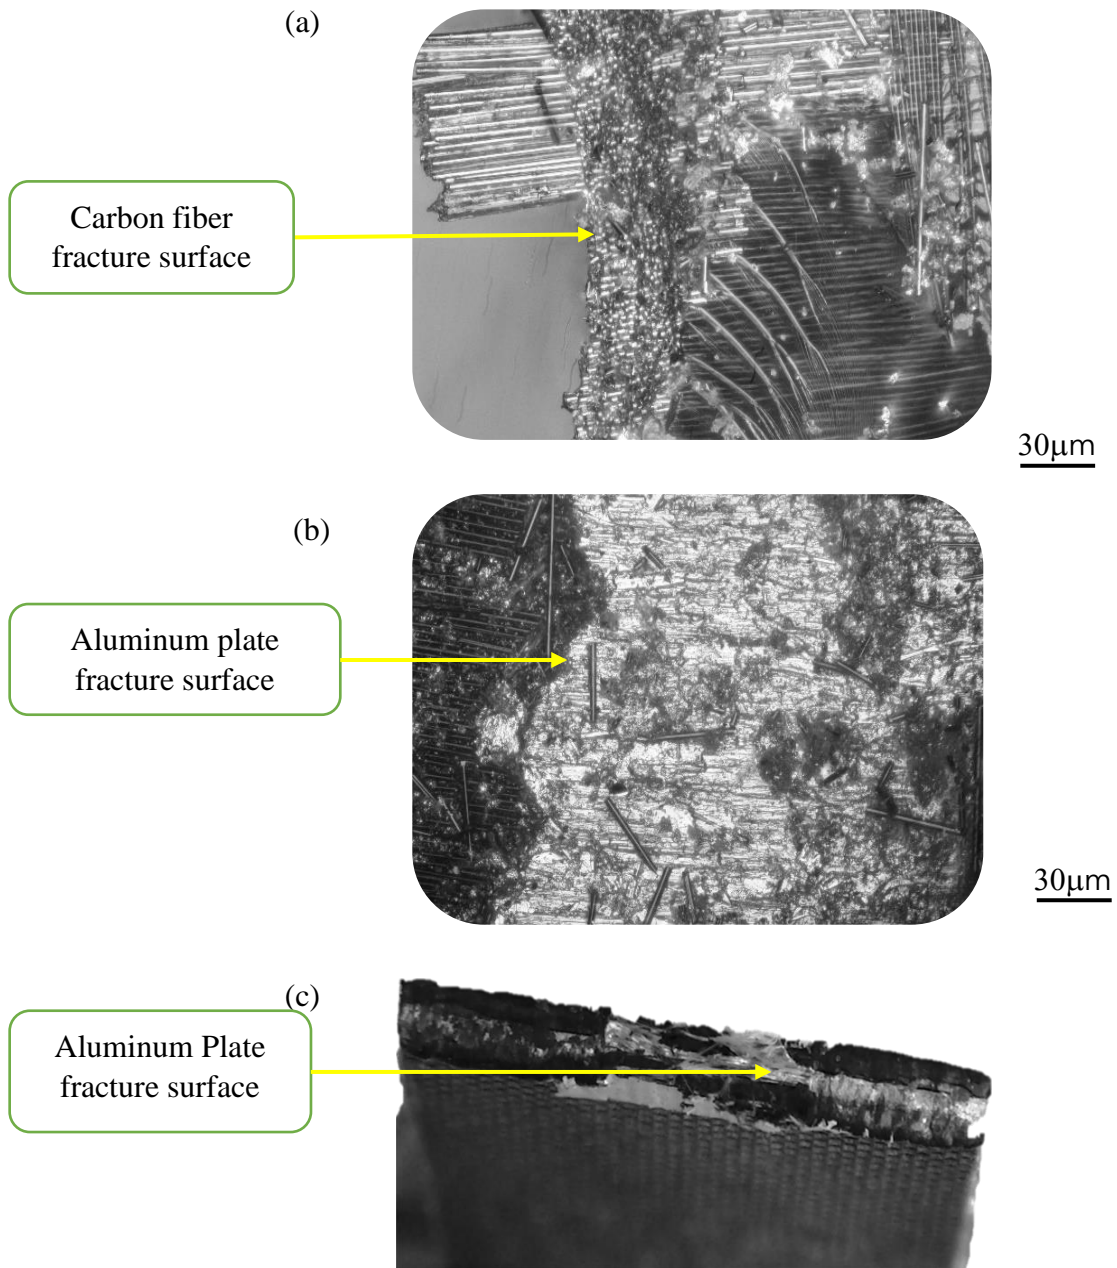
Fracture surface of *C* type specimen at $R = -1$ (shear fracture): (a) & (b) Microscopic view (c) Naked eye view
